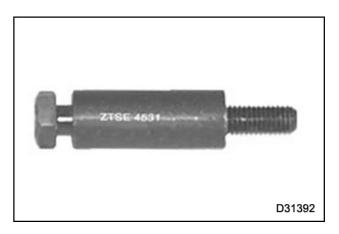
Glow Plug Sleeve Remover ZTSE4531
